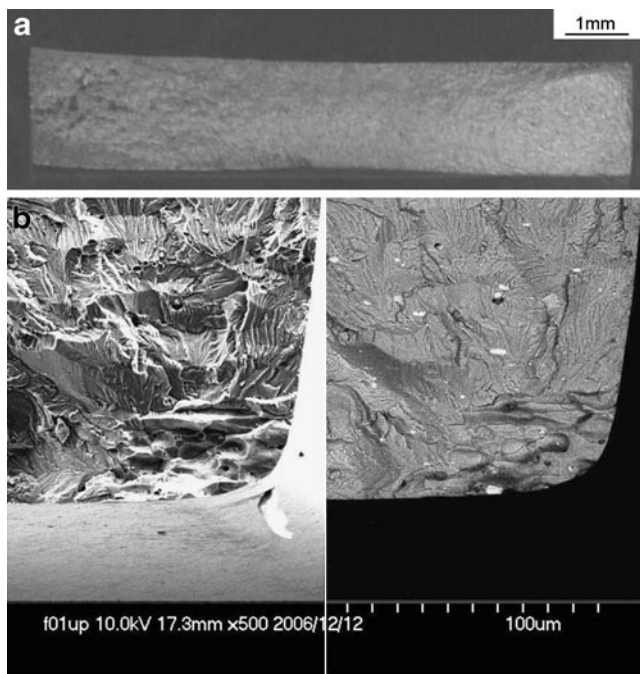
Typical fracture surface in case particle is crack origin. a Fracture surface. b Fracture surface near origin
